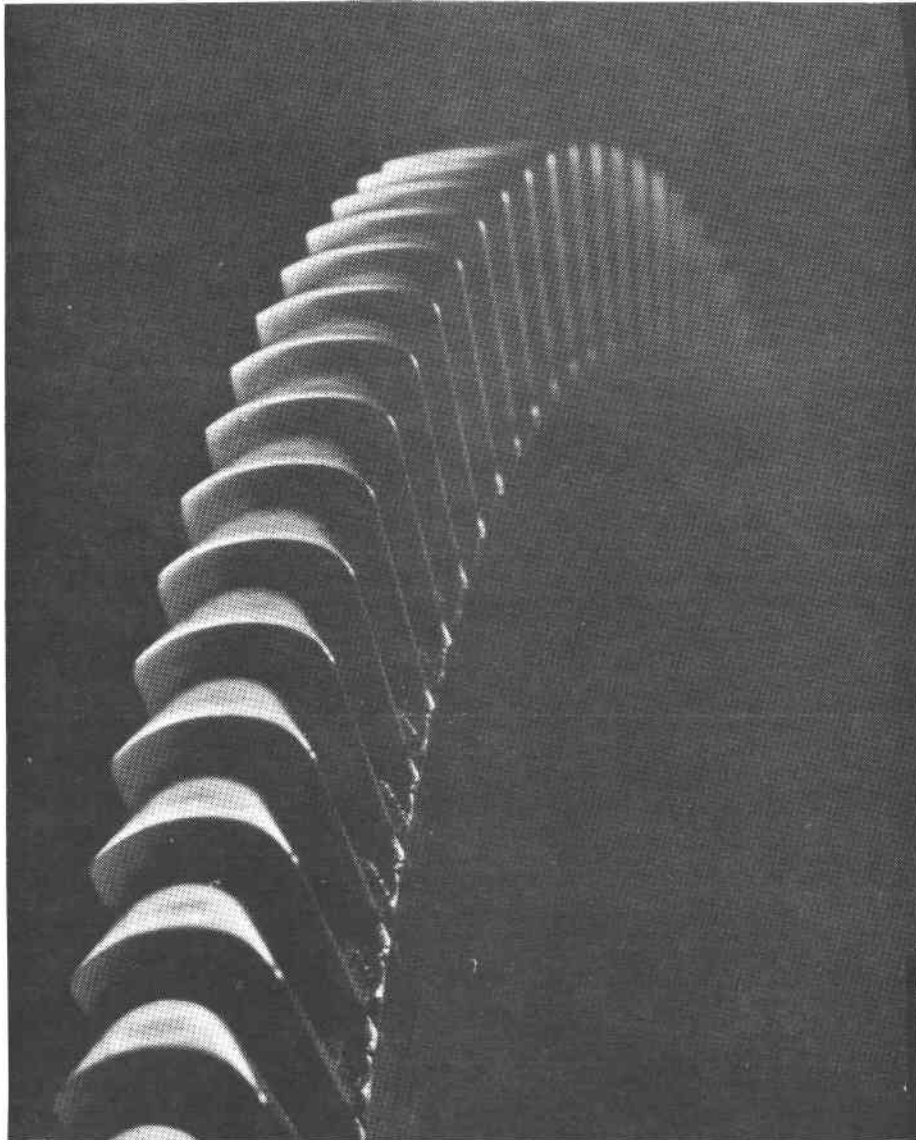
BLADE PROFILE OF ELECTROCHEMICALLY MILLED TURBINE WHEEL
